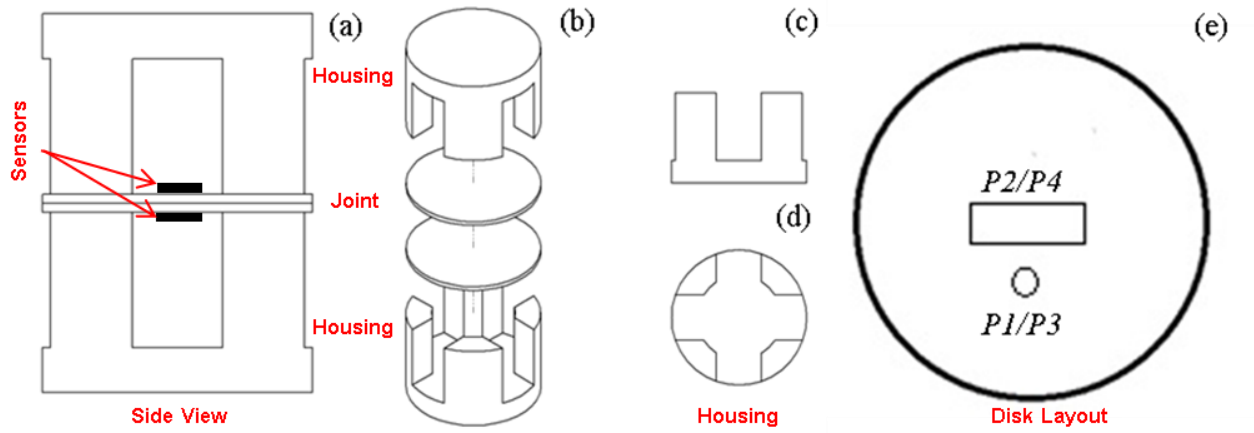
Experimental setup: side view of rig (a), exploded view of rig (b), side view of housing (c), top view of housing (d), and positioning of PZTs (e).
